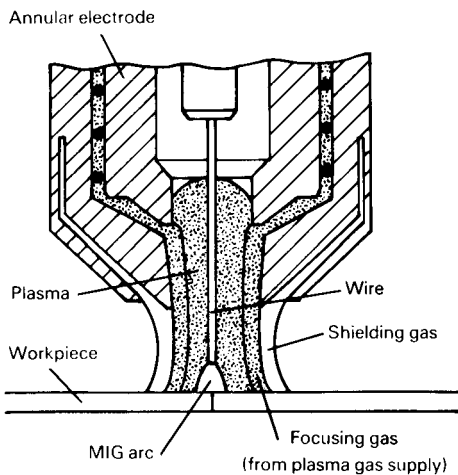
Schematic of modern plasma gas metal arc welding torch with annular plasma arc welding electrode and additional (focusing) gas stream. Source: Ref 1
